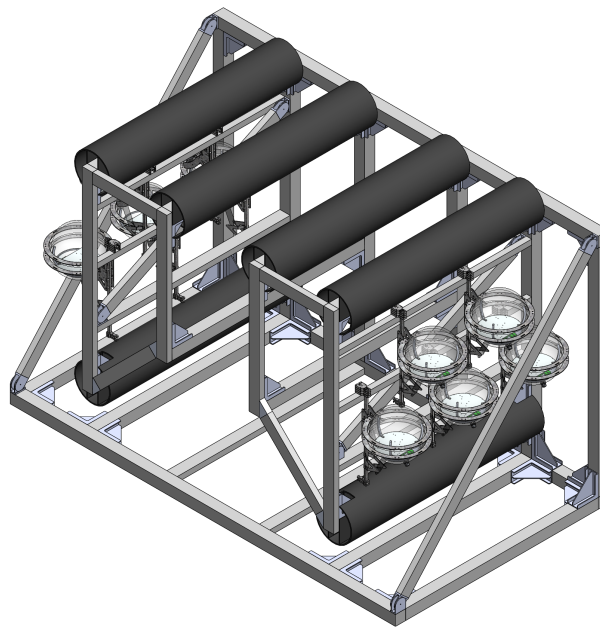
Technical drawing of the tray. Courtesy of Christian Spanneller [6].
